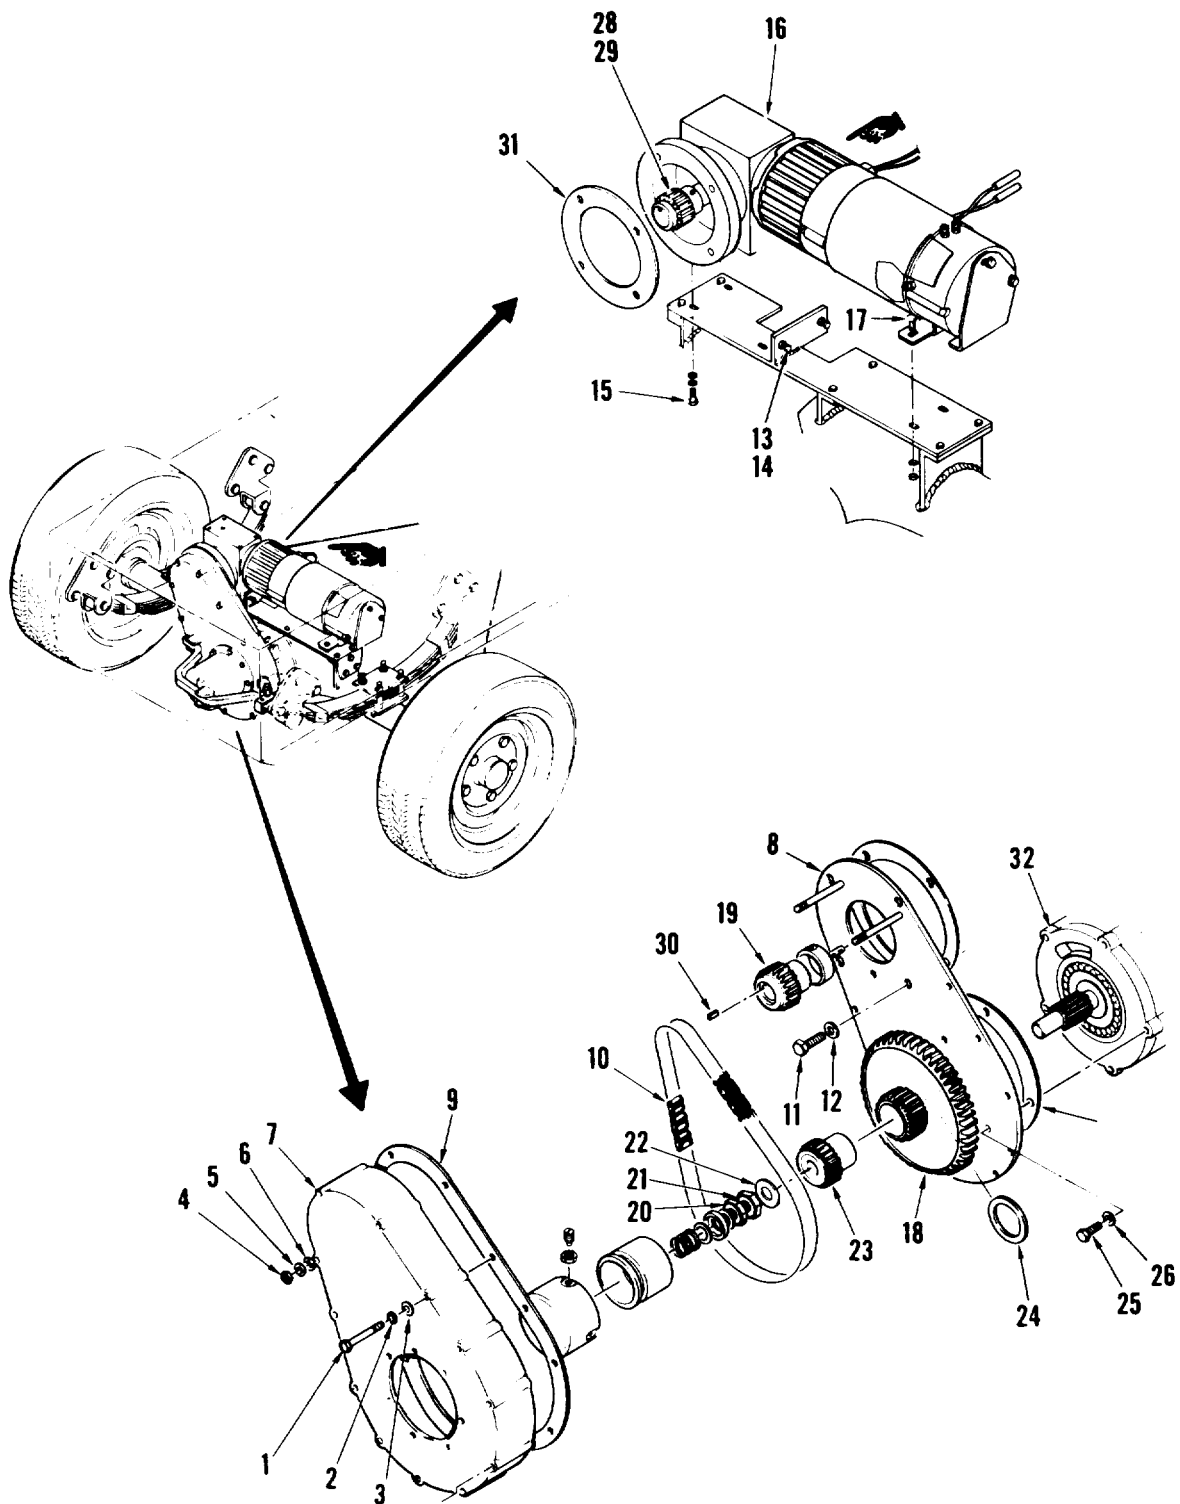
Traction Motor, Gear Drive, and Chain Drive Assembly
